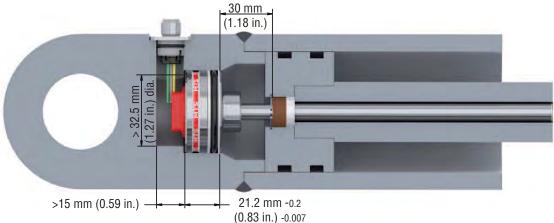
MH-Series Model MH rod-style sensor mechanical installation example
